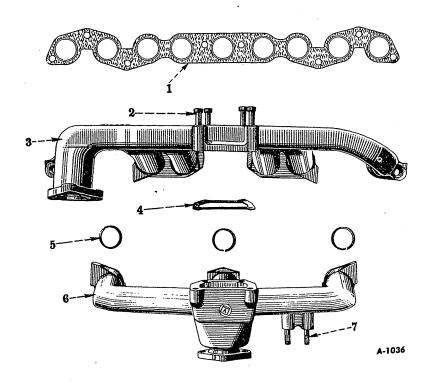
ENGINE INTAKE AND EXHAUST MANIFOLDS
